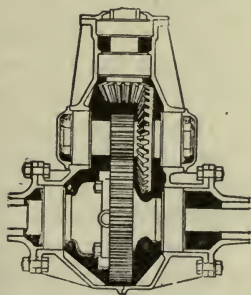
Double Reduction Gears as used in Rear Axle Drive.
